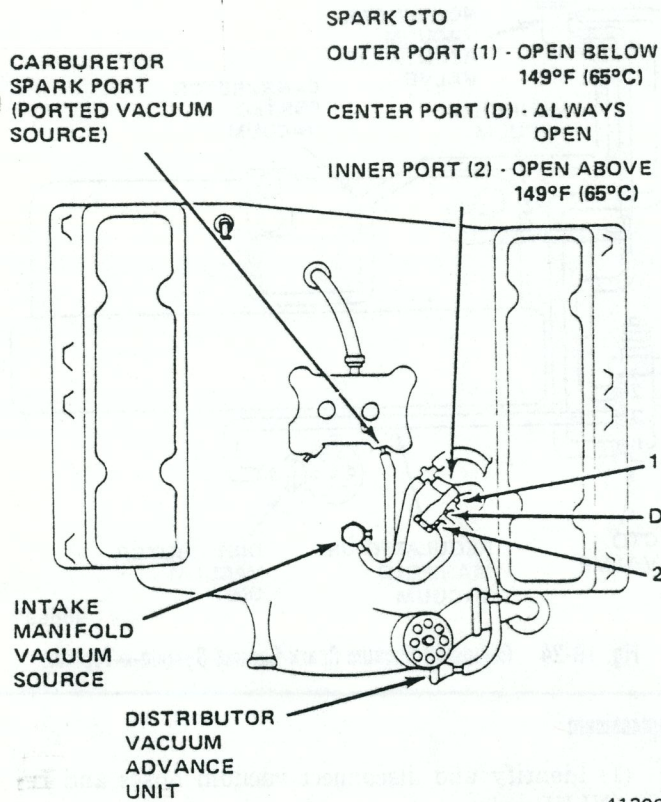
G-21 Spark Control System—Typical—Six- and Eight-Cylinder Engines With Standard Cooling System
